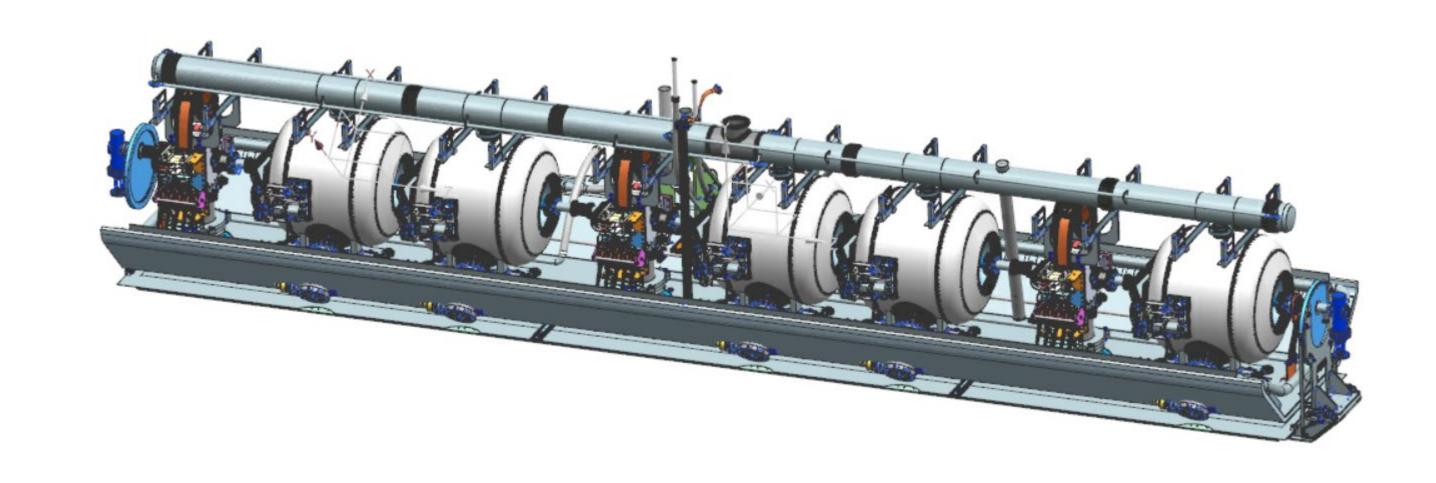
SSR2 Cryomodule String on Strongback Assembly
